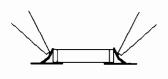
Use of two soldering irons to remove a passive surface-mounted component: hardly a practical way of going about it.
